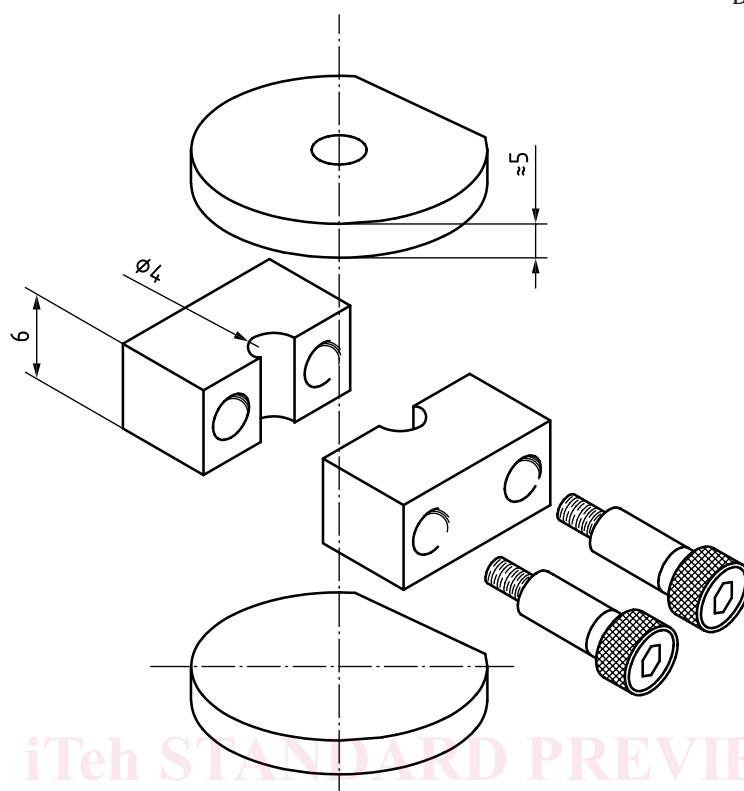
Mould and plates for preparation of compressive strength test specimens
